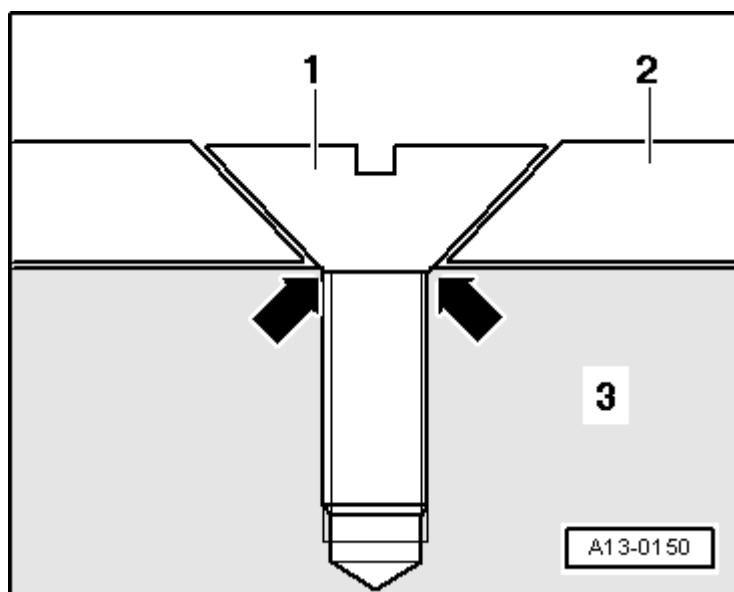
Identifying Attachment Points, Countersunk Screws, Crankshaft & Sensor Wheel
